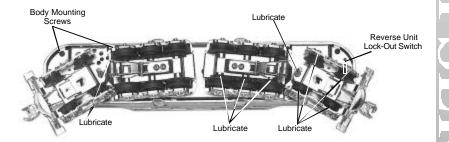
Lubrication, Body Mount Screws, and Lock-Out Switch Locations
